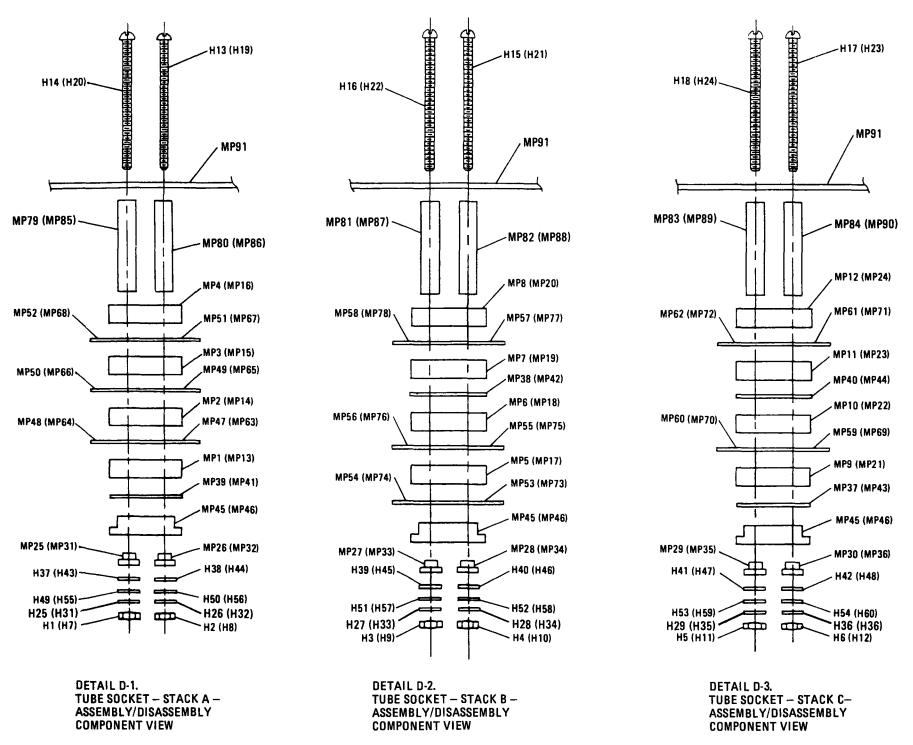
Final Tube Assembly 1A1MP6, Part No. 8948-3470, Component Locations (Sheet 2 of 3)
